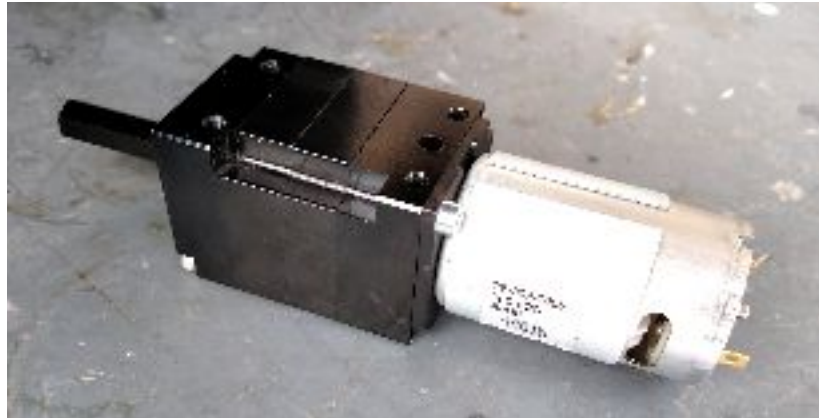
12V DC motor with 100:1 Vex VersaPlanetary gearbox.
